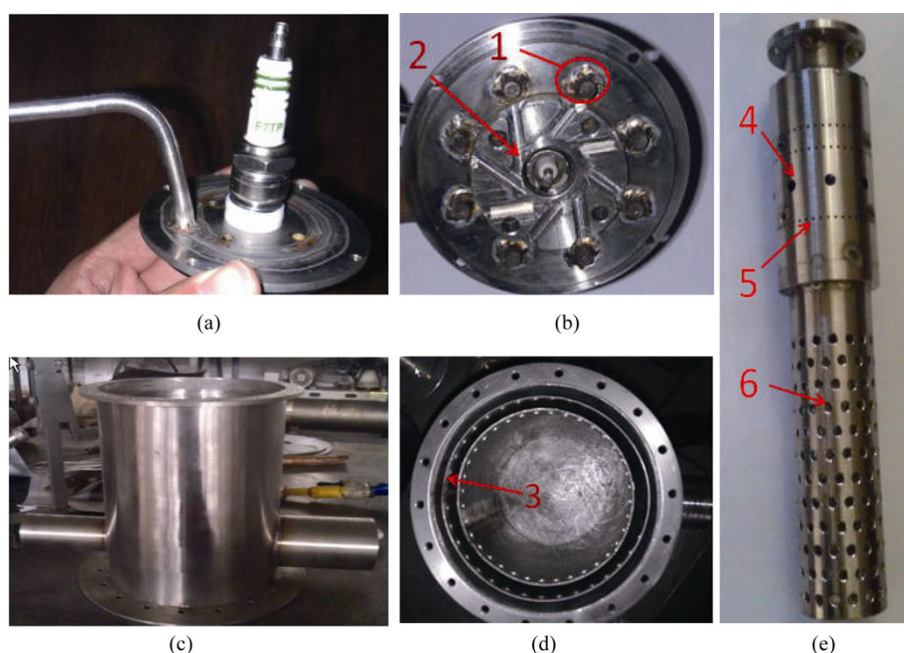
Some key parts of the machined combustion chamber. (a) Spark plug and natural gas inlet tube; (b) Swirler; 1-nozzle holes; 2-swirler channel; (c) Heat exchange cavity; 3-air pre-heating layer; (d) Outside shell of the combustion chamber (e) Flame tube; 4-film holes; 5-air mixing holes; 6-corn holes
